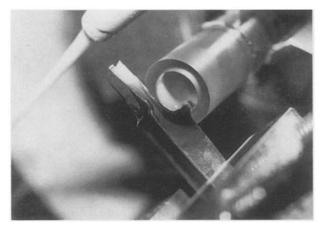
A piece of annealed polycarbonate rod being machined on a lathe. The special cutter is excavating the well. Also shown is the cutting edge used for turning the anchoring plug.
